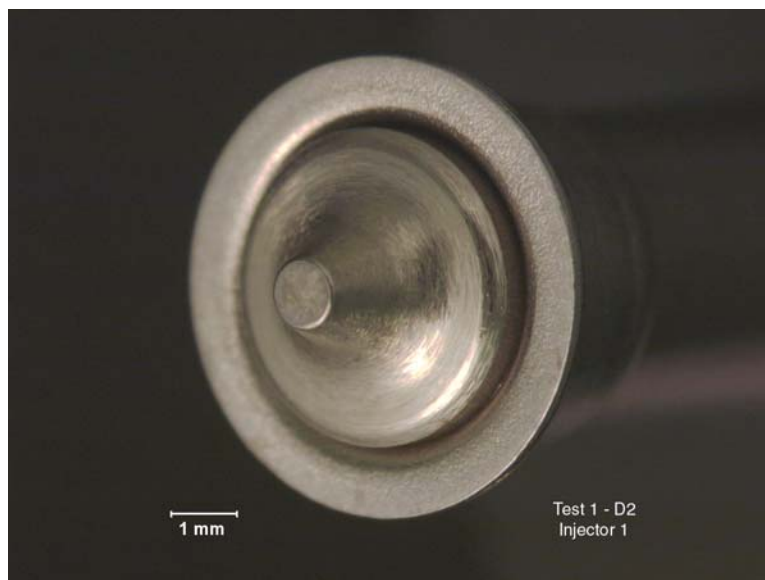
AF7469 ULSD, Lower Hydraulic Coupler Piston
